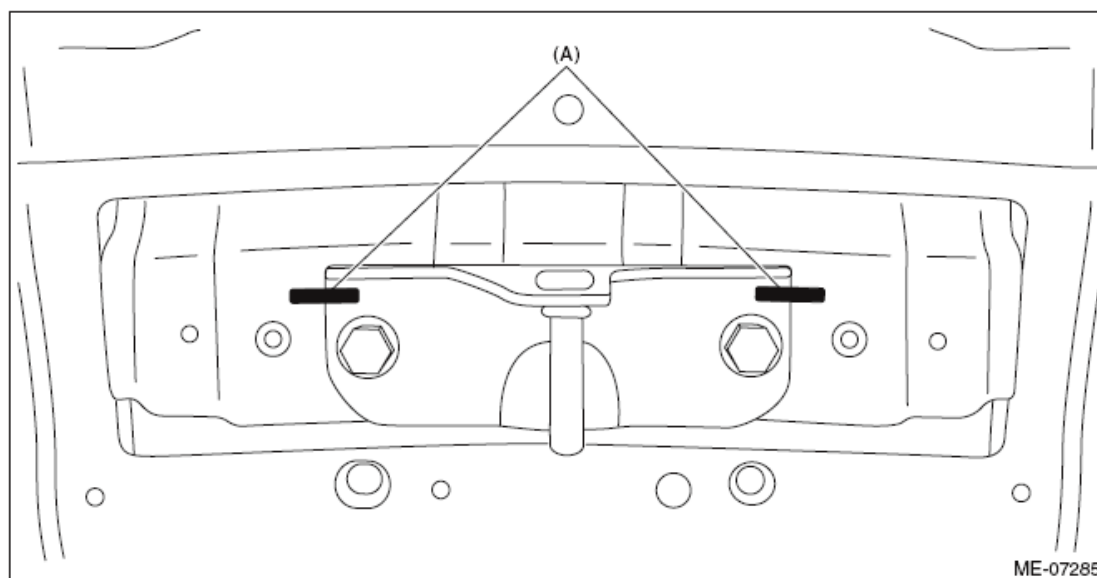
Identifying Front Hood And Front Hood Striker Alignment Marks
